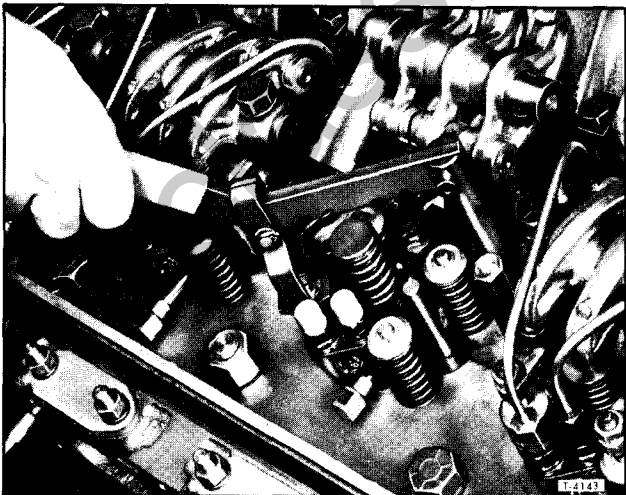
Use of Special Tool (J-7455) for Replacing Valve Spring with Cylinder Head Installed
